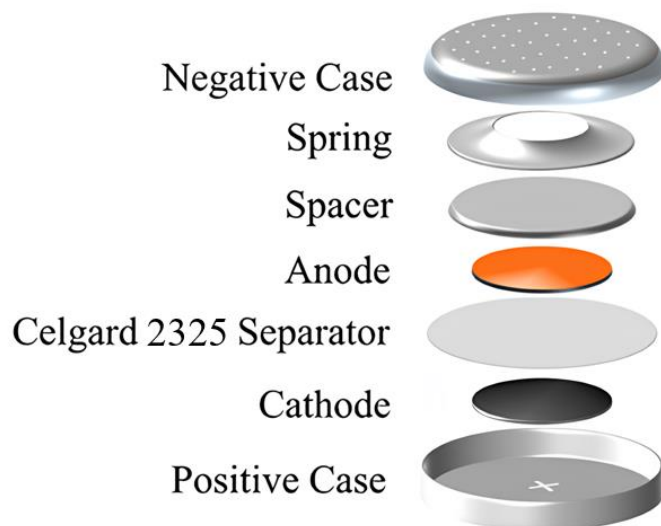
Assembly structure of the coin cell (Xue *et al.*, 2023).
